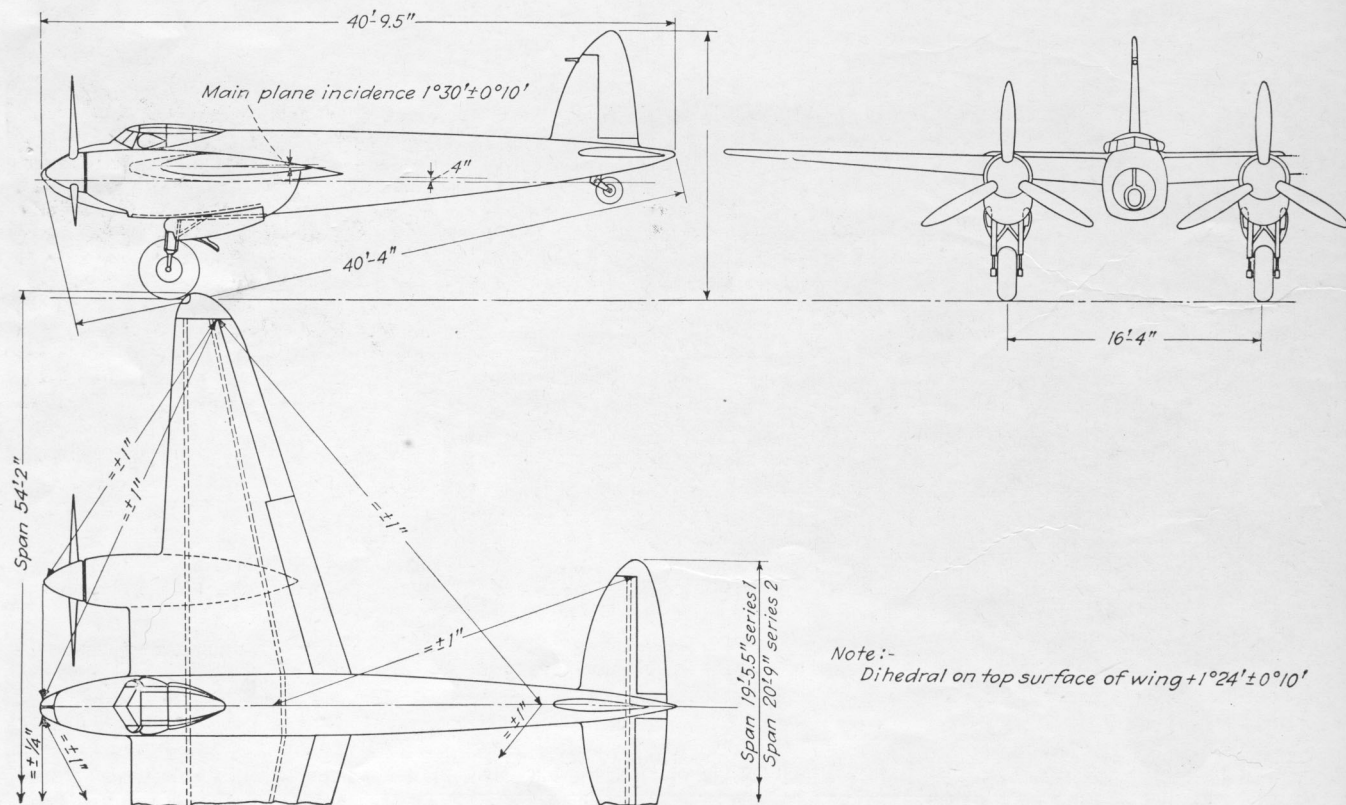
Three-view drawing of a de Havilland Mosquito.
